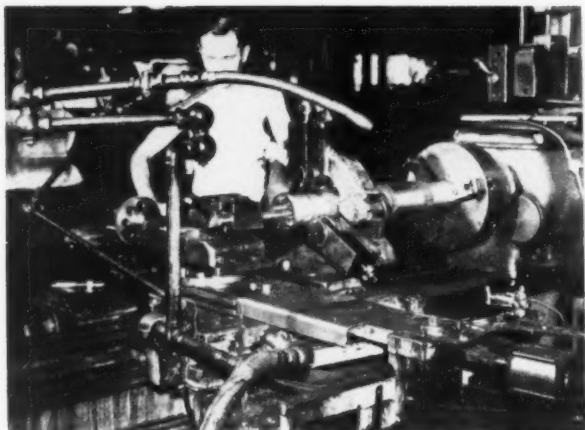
Engine lathes on production work are equipped with the profiler attachment shown here. Air cylinder at rear of lathe works on cross slide to hold the stylus against the profile blade. The profile template is at the front of lathe. The job on the machine is reaming the interior of a landing gear shaft.
